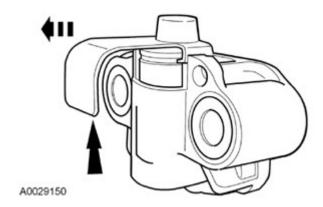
Removing Retaining Clip From LH Timing Chain Tensioner Courtesy of FORD MOTOR CO.
